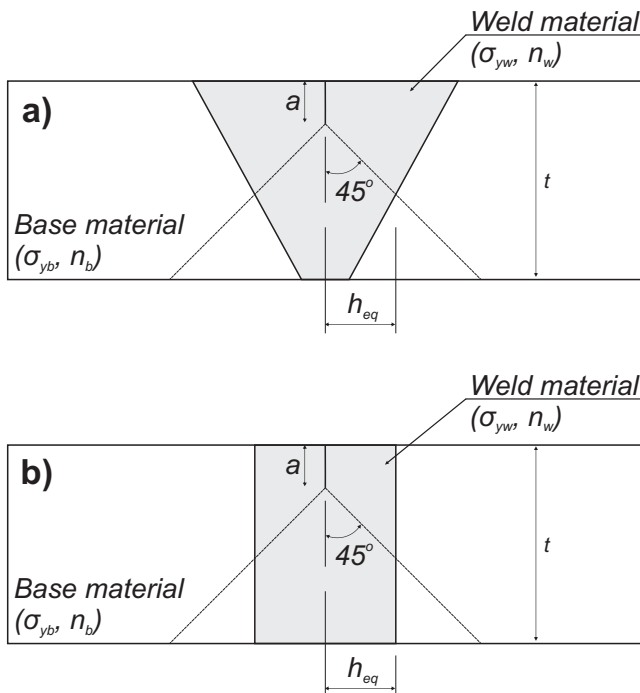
Weld bevel simplification scheme for a pipeline girth weld without a clad layer.
